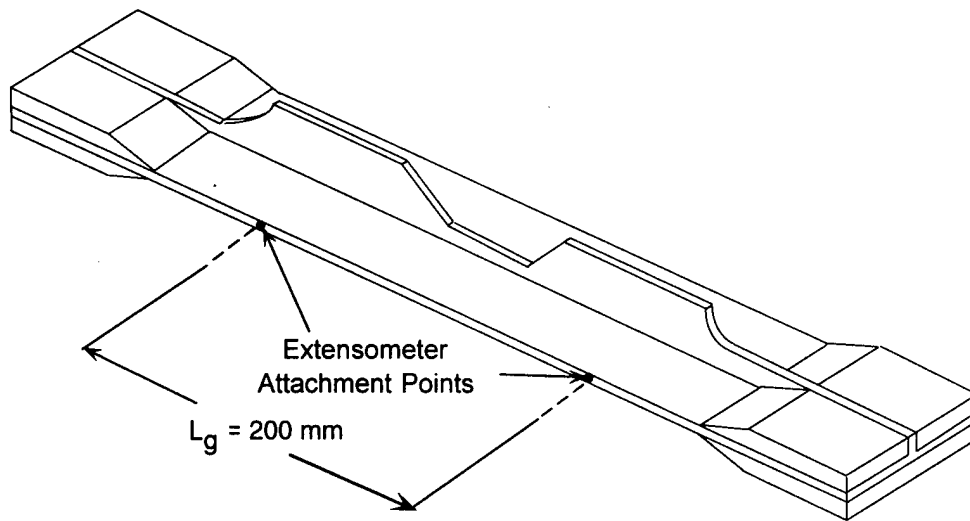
FATIGUE TEST SPECIMEN AND EXTENSOMETER ATTACHMENT POINTS
